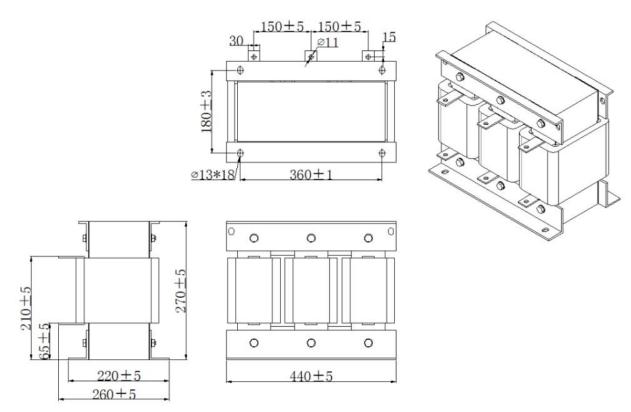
External Depater DE 150/0.5 I	Dimonsions and Mounting Dimonsions
